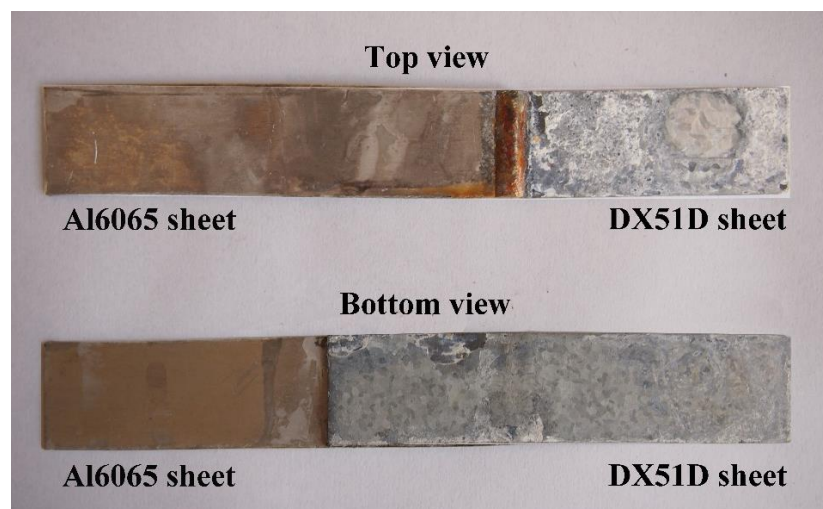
A corrosive sample of Test Weld 4 after 96 hours in salt chamber.
